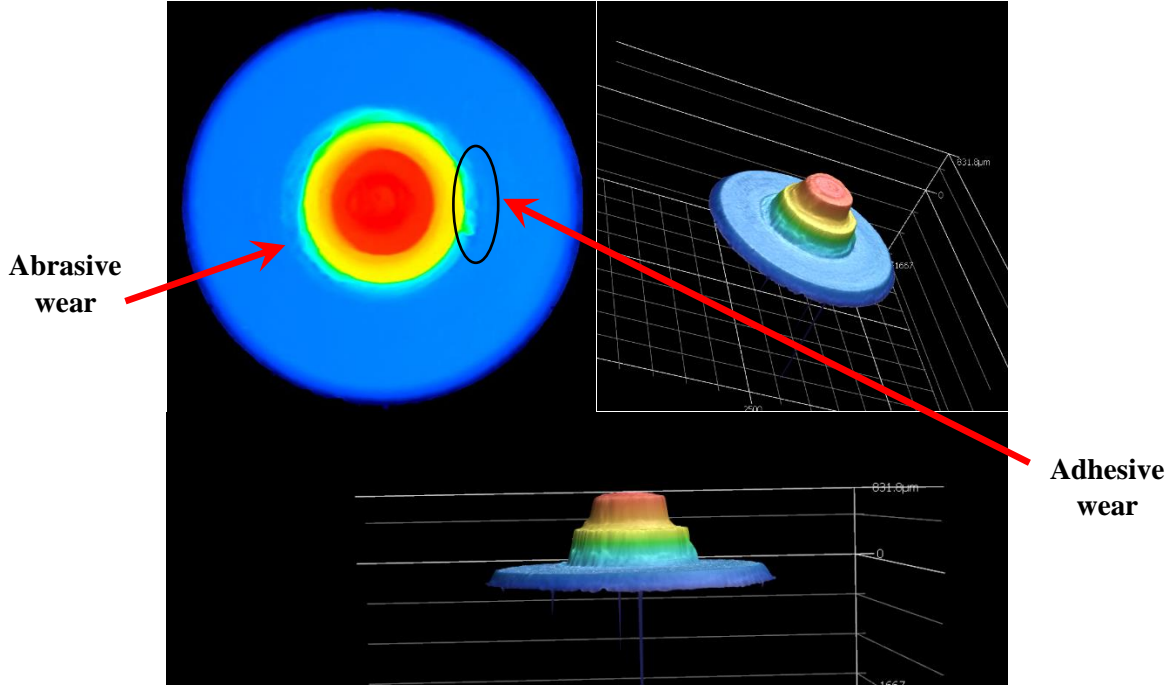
Pin surface profile measurement for the used tool in top view, 3D view, and front view
